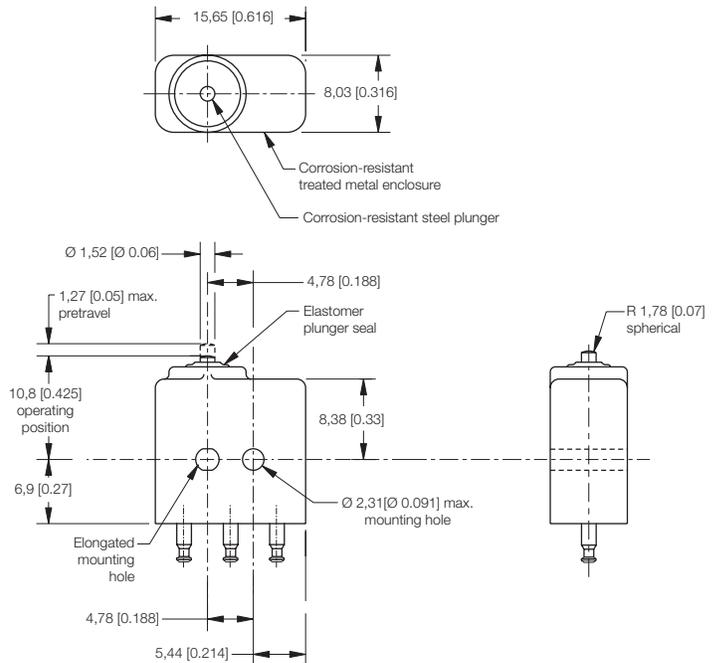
MICRO SWITCH XE Dimensions, Solder Terminal
